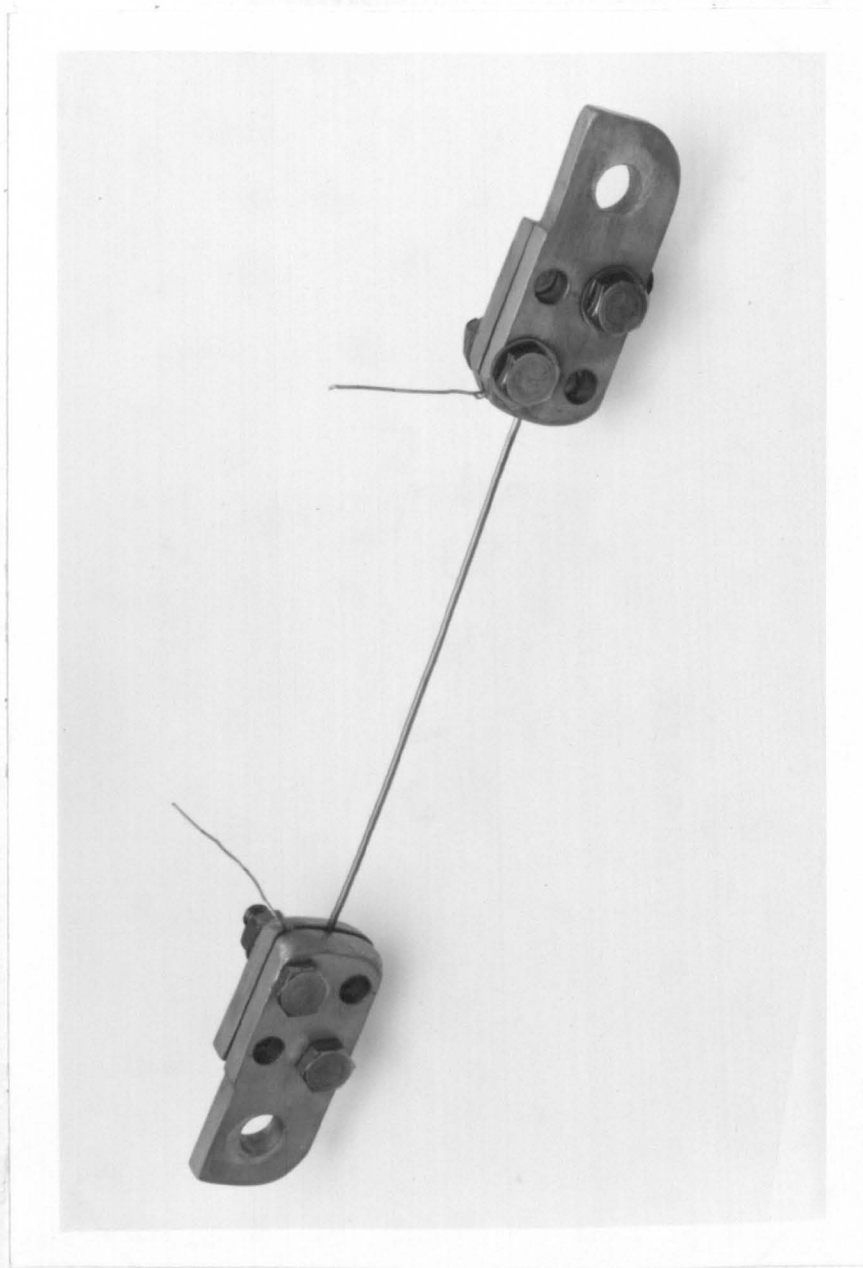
SPECIMEN ASSEMBLY WITH CLAMPED ENDS - METHOD 'B'
